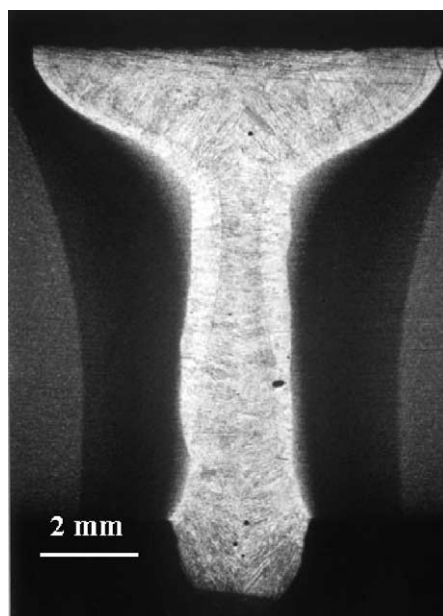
Macrograph of a Eurofer plate laser weld, 9 mm thick.
